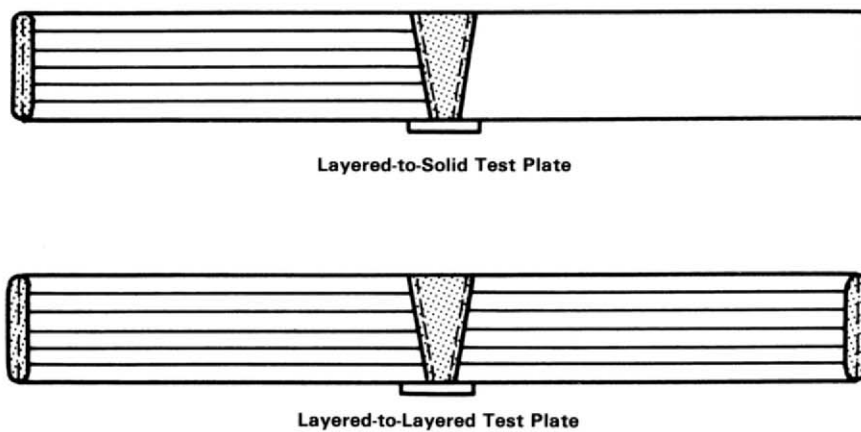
SOLID-TO-LAYERED AND LAYERED-TO-LAYERED TEST PLATES
